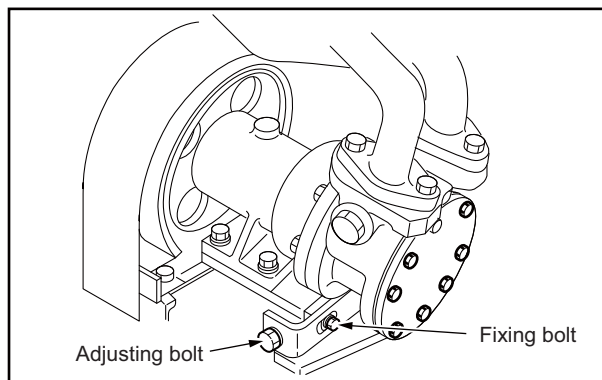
Belt Tension (Seawater Pump Side) - Adjust
